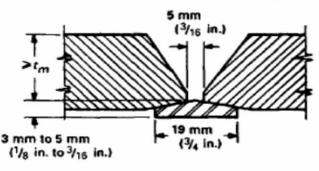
Typical backing rings and consumable inserts (ASME B31.3)
